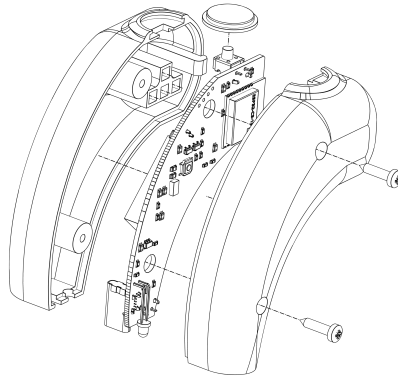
Exploded view of the 3D model of the BUG, making the placement and shape of the printed circuit board on the inside clearly visible.
